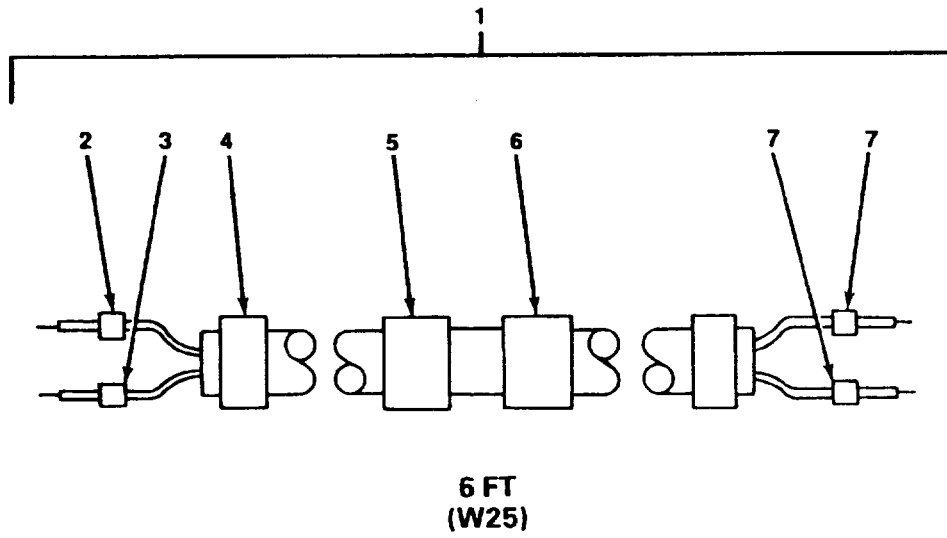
Cable Assemblies W25, W26, W28, W30 through W32 (Sheet 1 of 3).
